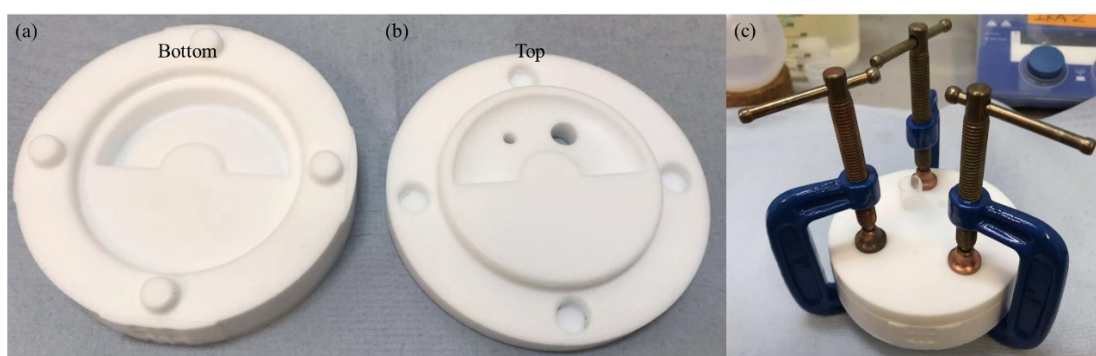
The images of PTFE mould for meniscus casting are (a) bottom and (b) top sections. (c) The moulds parts are tightened by 3 G-clamps. (Diameter of mould is 9cm)
